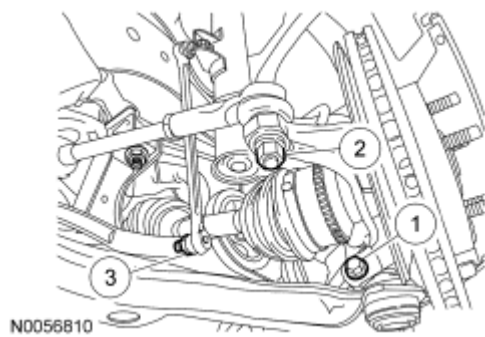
Identifying Lower Ball Joint-To-Knuckle Bolt, Retaining Nut And Stabilizer Bar Link
